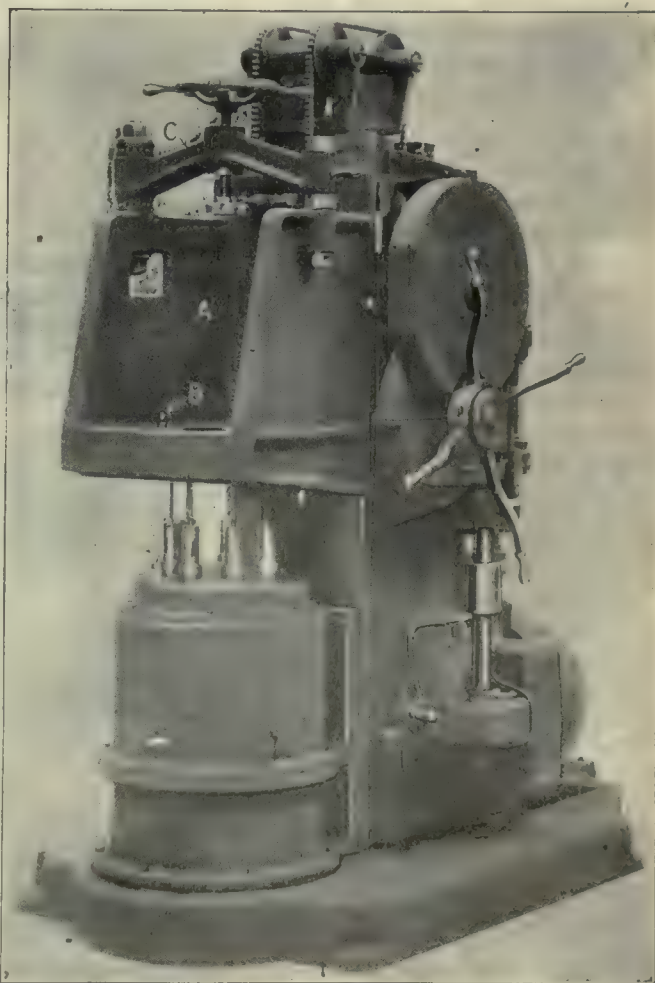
MACHINE FOR INVERTED DRILLING OF AIR-BRAKE RESERVOIR CYLINDER
